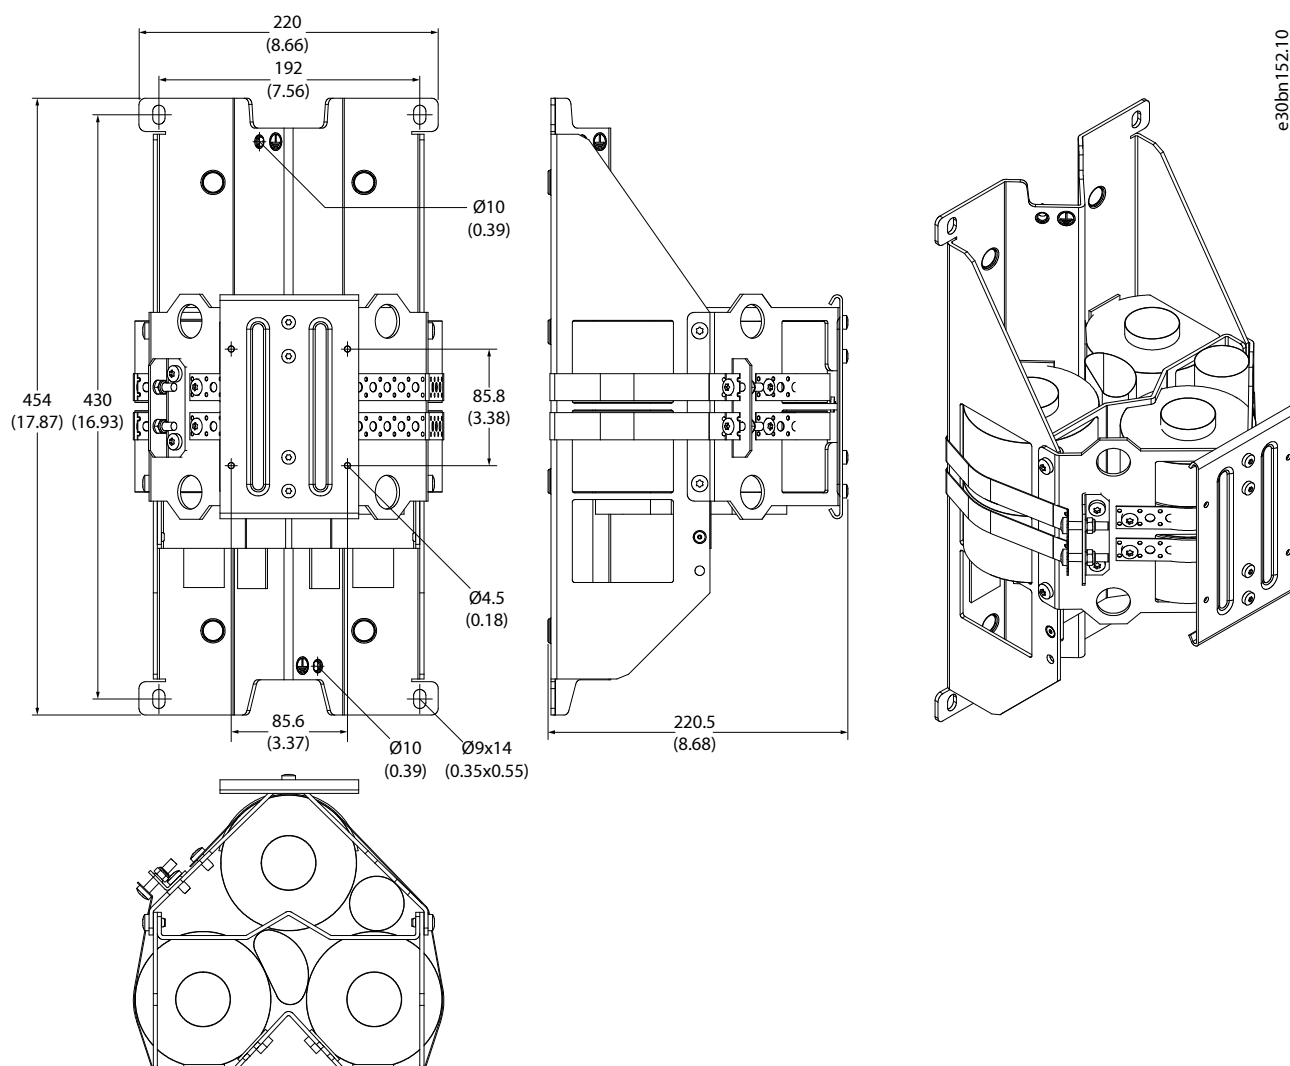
Dimensions of the dU/dt Filter 261 A Inductor in mm (in)
